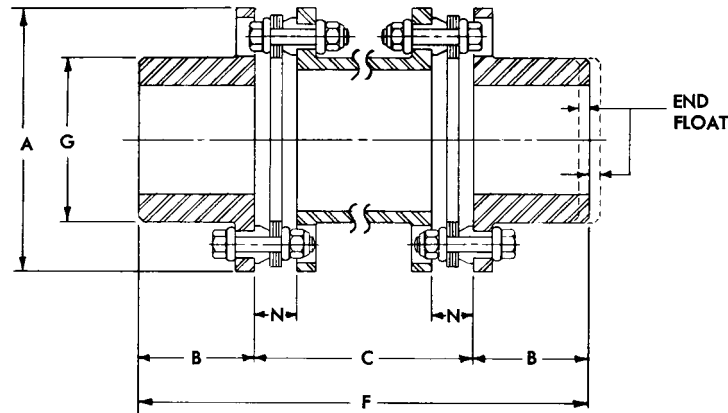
Schematic view of a flanged sleeve coupling.
